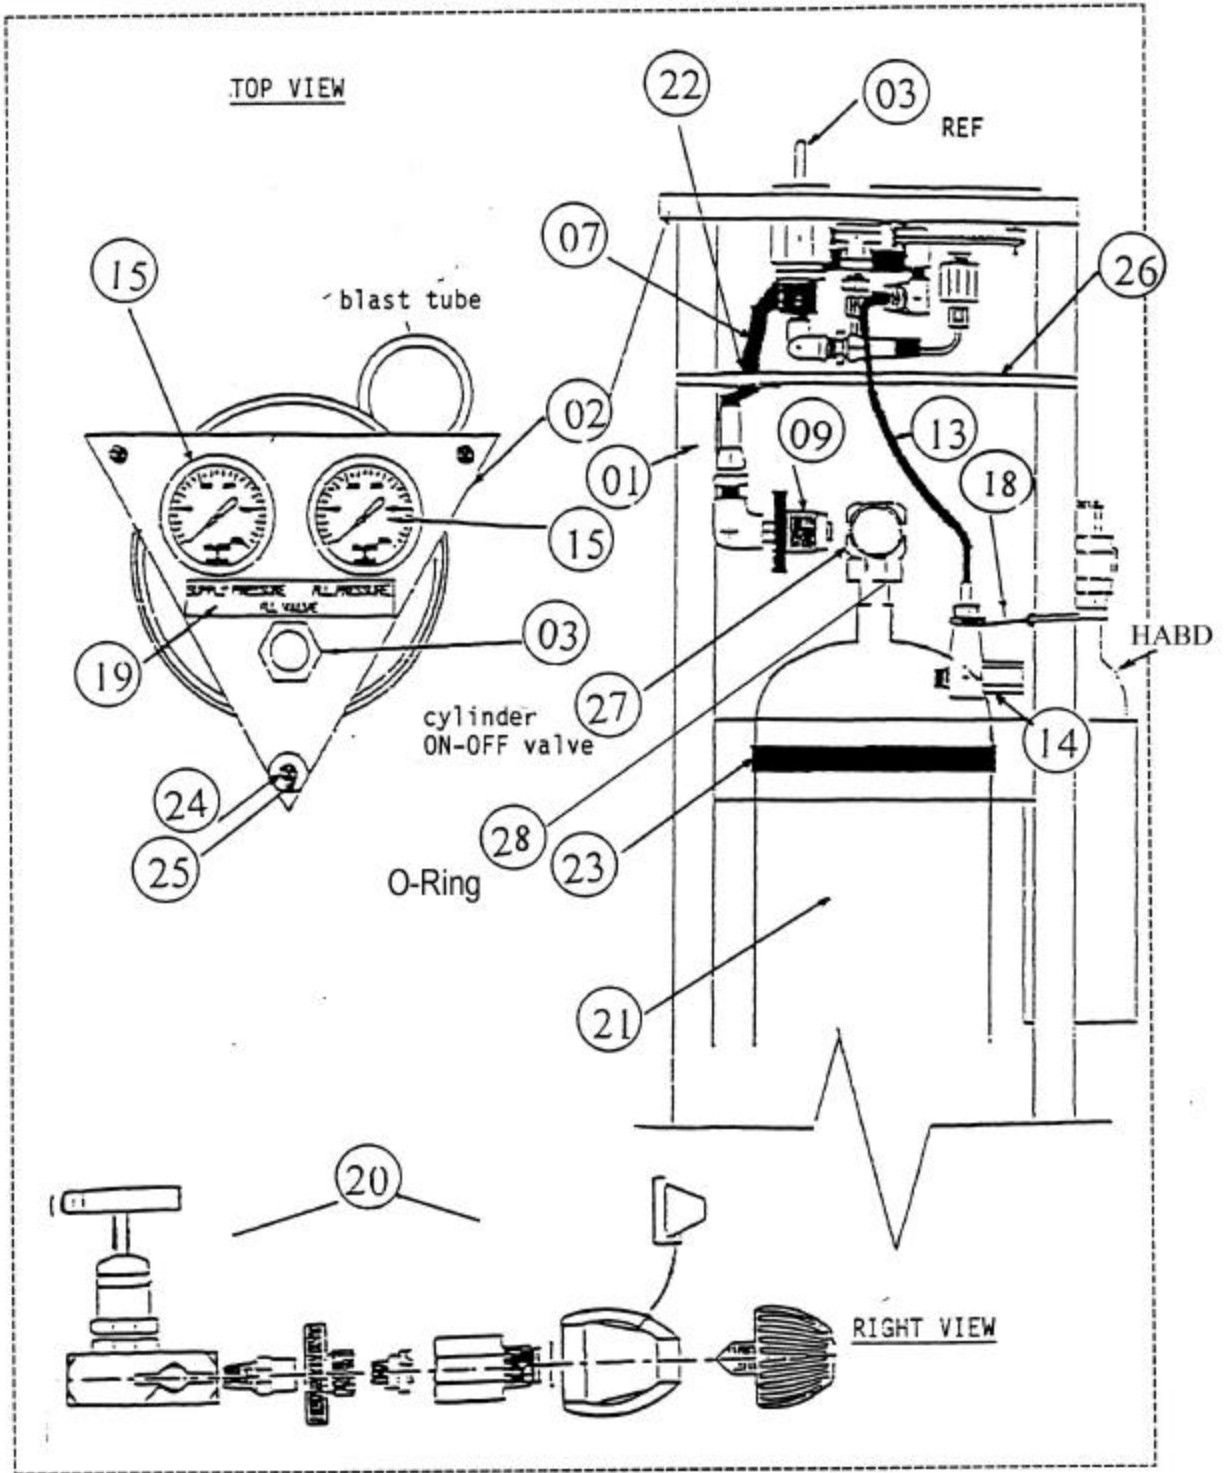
Portable Refill System (PRS) CQU-10/U
